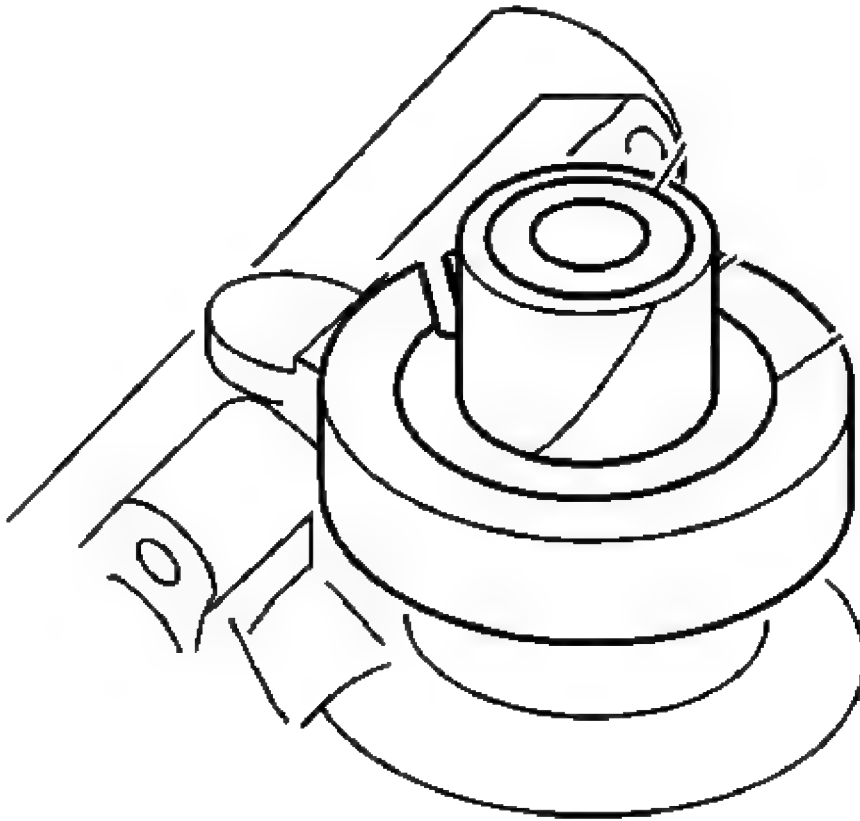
Identifying Power Steering Pump Drive Shaft Seal
